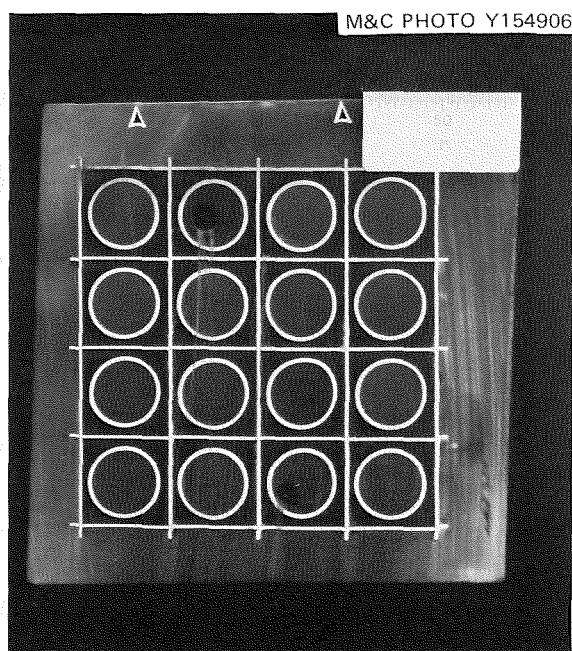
Section through upper grid of B-2 at 66.5-cm elevation.
